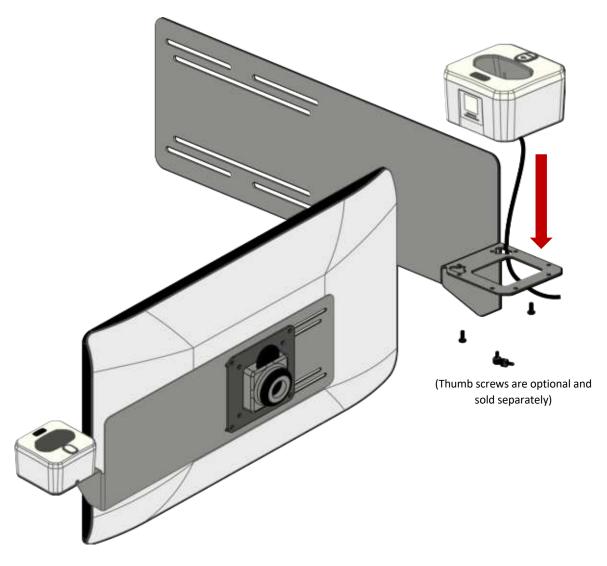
Install Charging Station with a VESA Mount CRA-MB7
